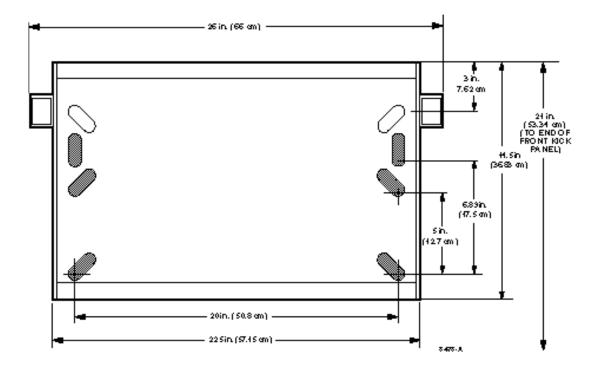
21-Inch Frame Section Base — CEV Mounting Holes
